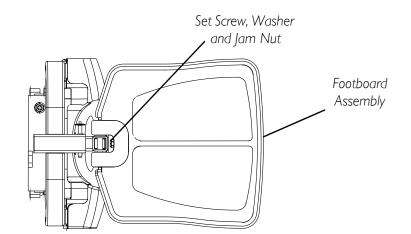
REMOVING/INSTALLING THE FOOTBOARD ASSEMBLY
